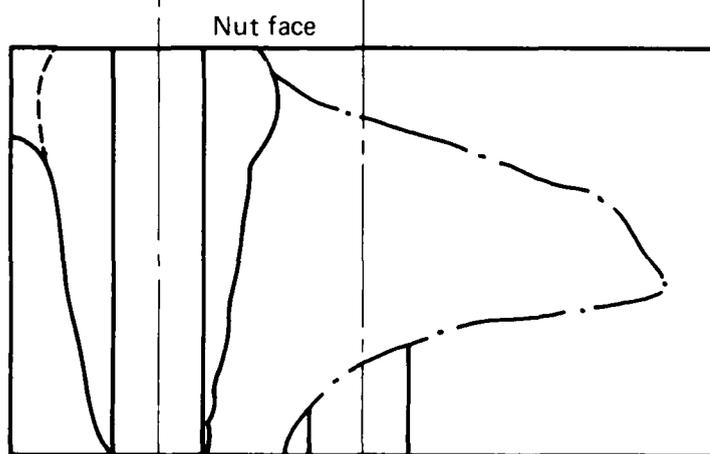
(a) FRACTURE SURFACES: SPECIMEN TYPE (C)
